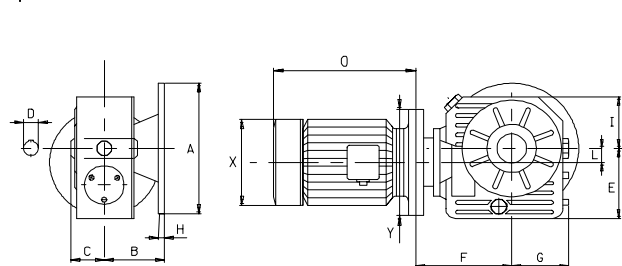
STM CBF Reduction gear with pre-reduction, flange version
